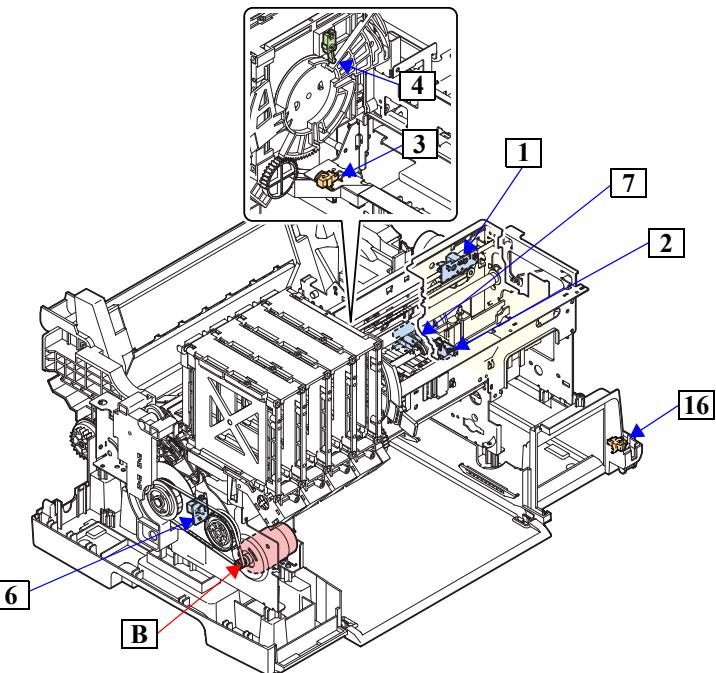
Motors & Sensors (front of the printer mechanism)
